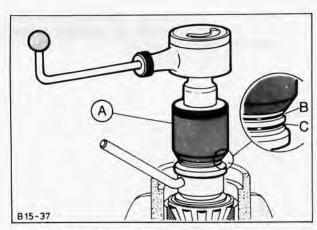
Pre-load sleeve 15-023 and pre-load gauge 15-041
